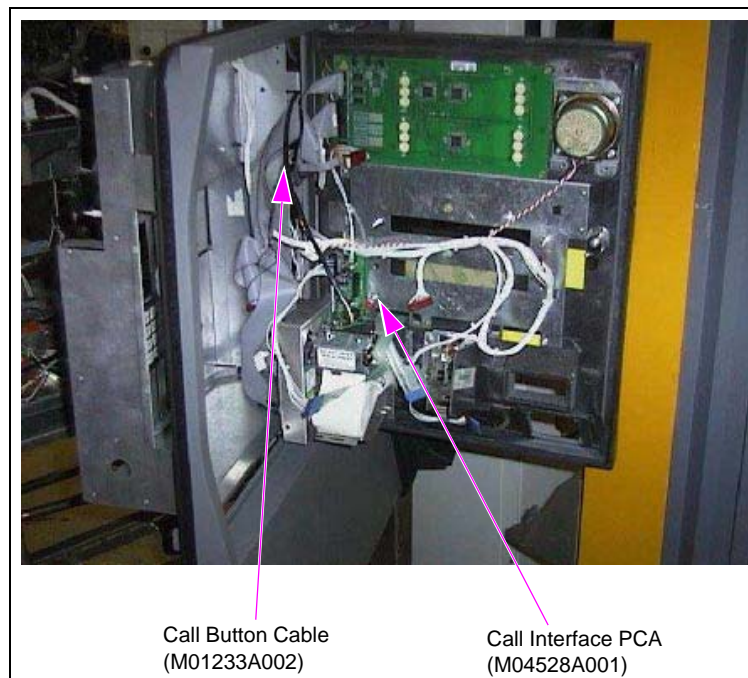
Rear View of Encore Main Door with Call Button Cable Run
